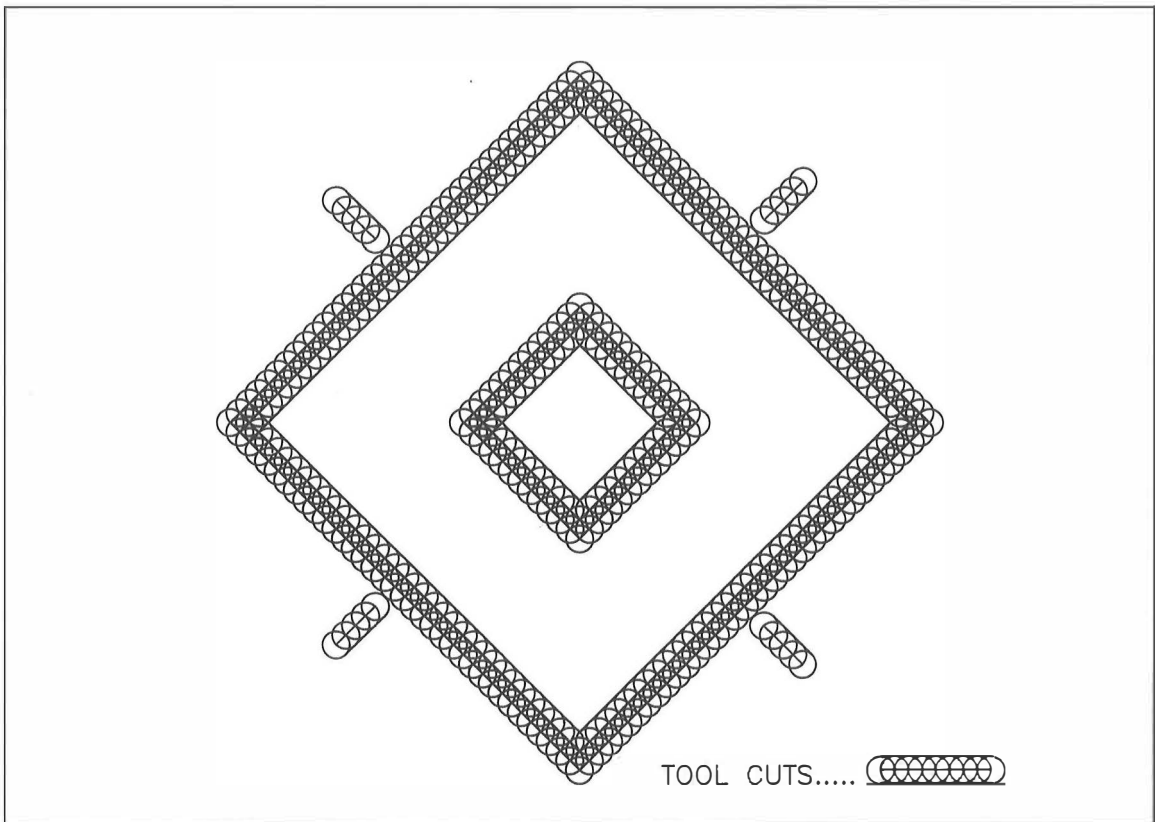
Drawing showing only the actual cuts made in the specified raw material for the 2-inch and 8-inch diamonds used in accuracy evaluation.
